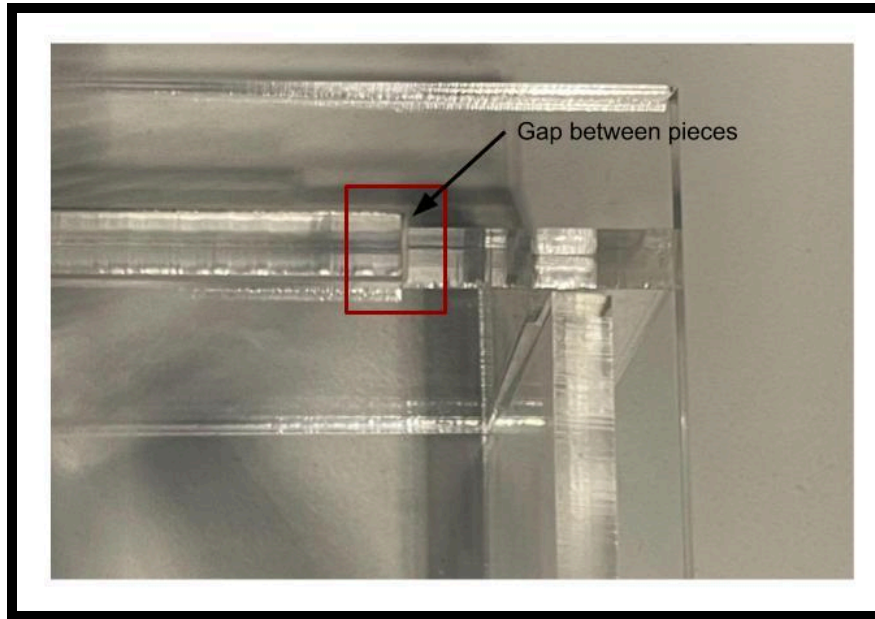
Illustration of gaps between pieces on the stand (Top facing)
